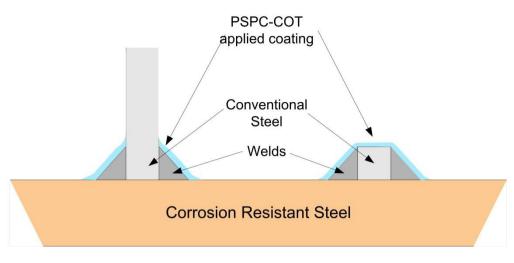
Range of coating when work attachments are welded to corrosion resistant steel
